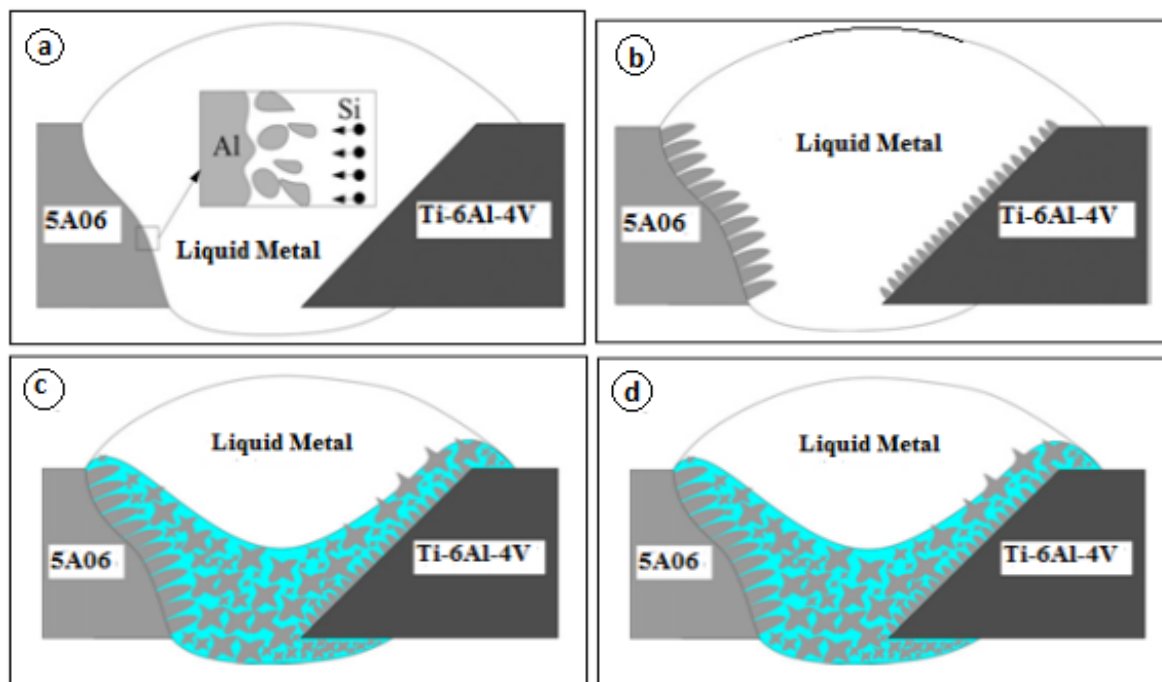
Crystallization behavior of fusion welding joint, (a) Formation of weld pool and diffusion of element Si, (b) Formation of CCZ, (c) Solidification of the seam and (d) Formation of the joint
